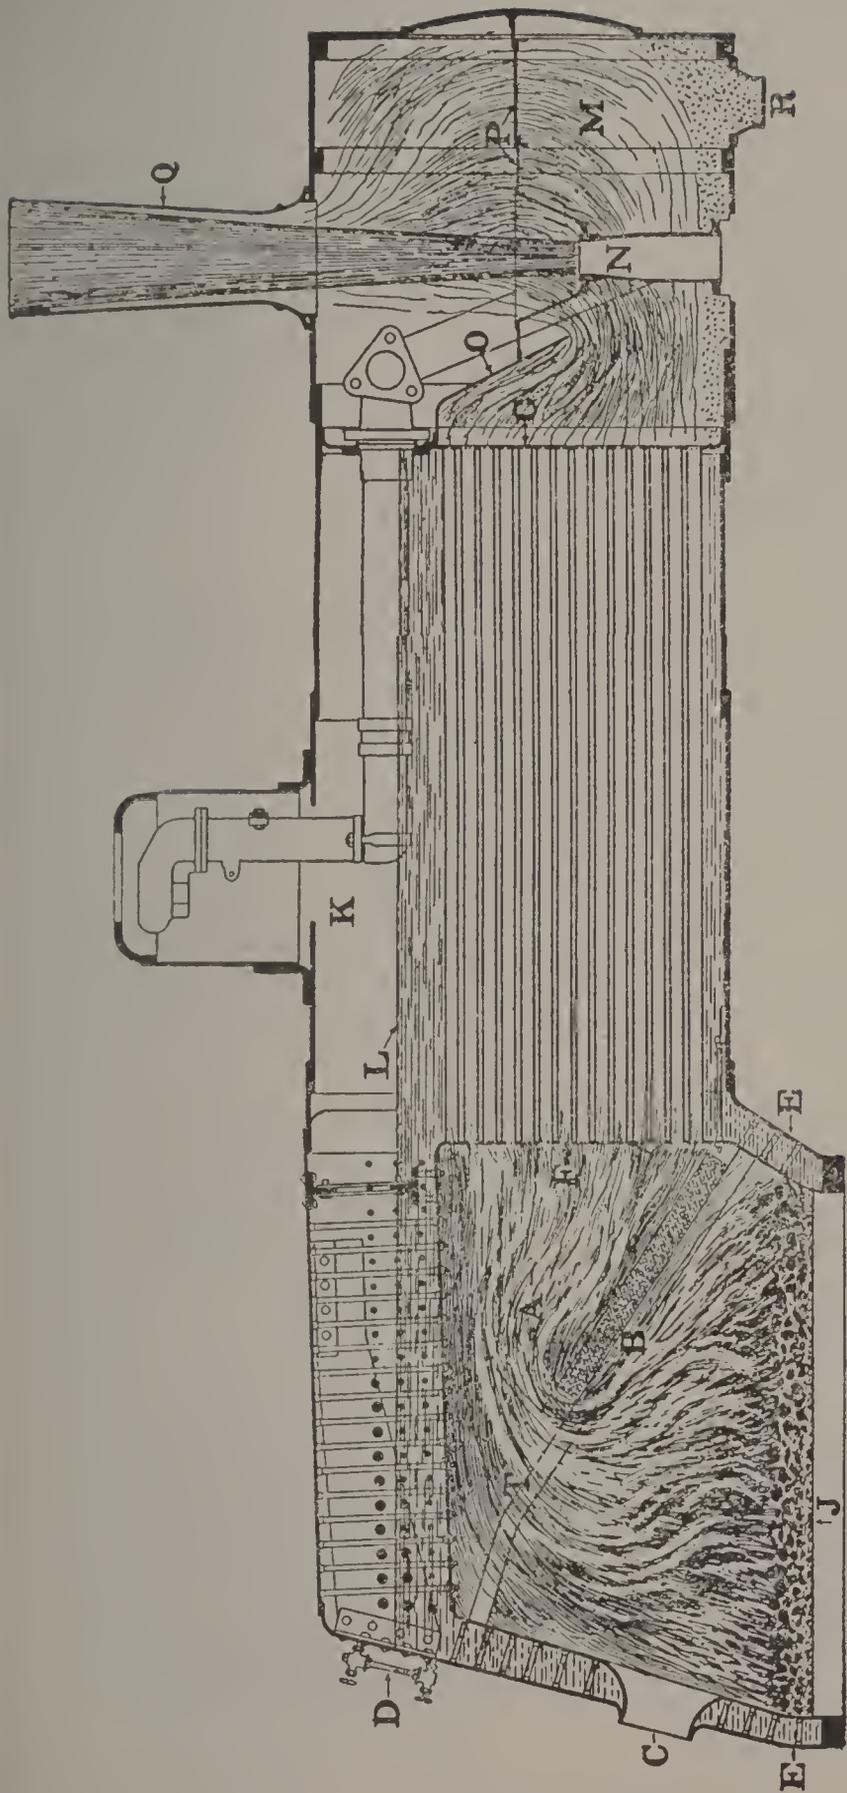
LONGITUDINAL SECTIONAL VIEW OF A LOCOMOTIVE BOILER
